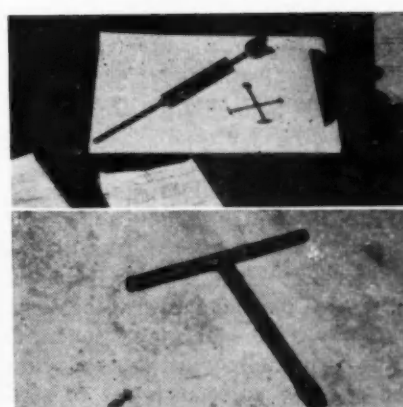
Special measuring tool designed to check for drum wear and eccentricity
